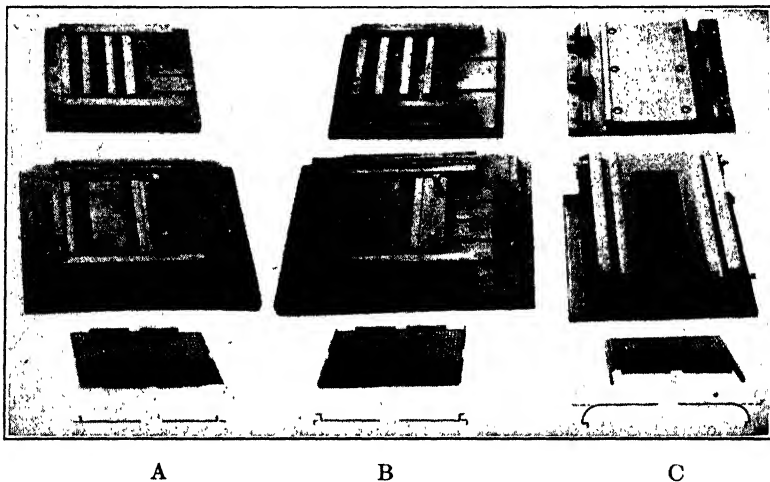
Three adjustable dies, progressively bending the flanges of a jacket top to interlock with other jacket parts.
